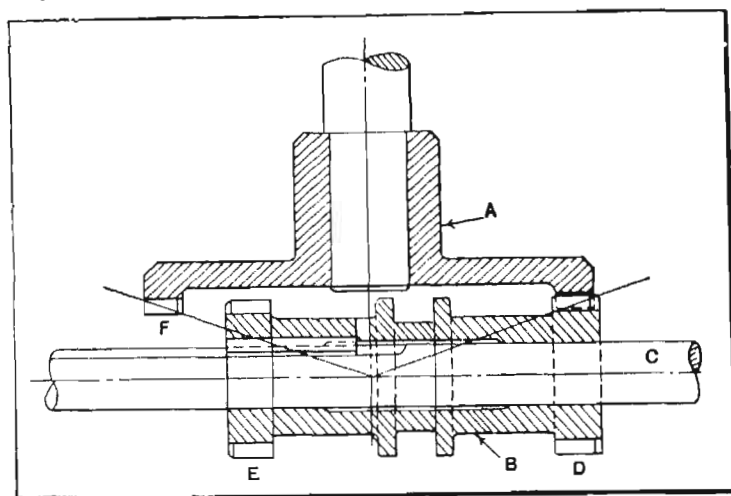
Reversible Face Gear Drive with Sliding Double Pinion
